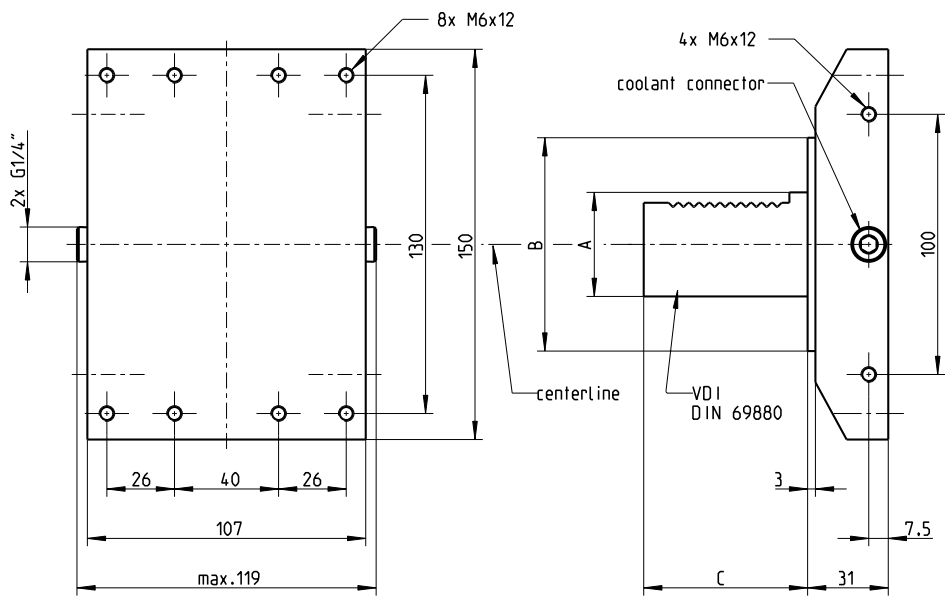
Machine adapter with straight shank for disk-type turret with VDI tool holding fixture Type 9129AB...
